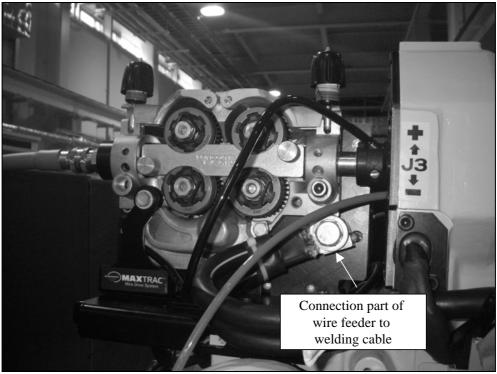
(g) Connection interface of Wire feeder (2/2)
